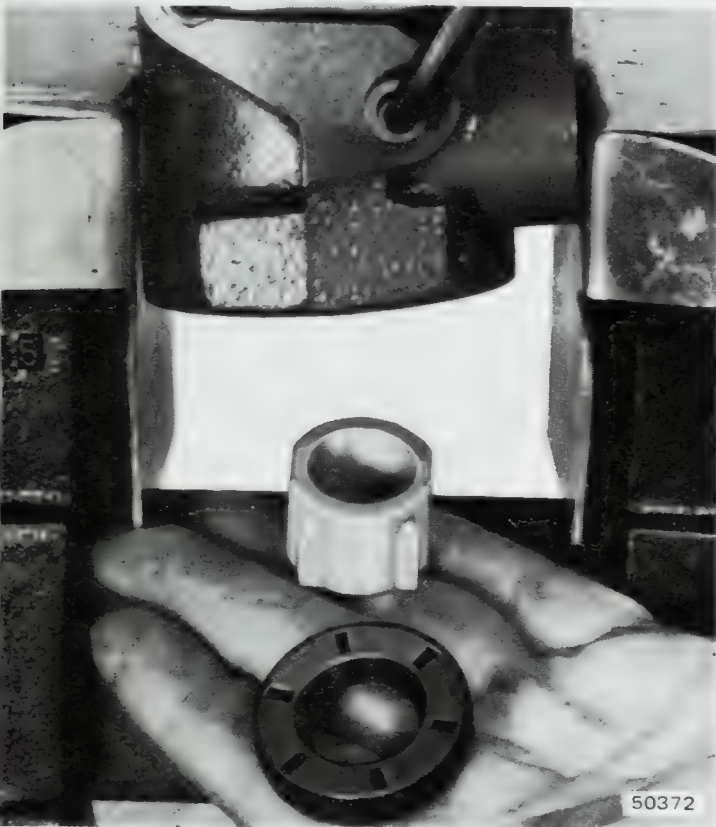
K-71 Upper Pinion Bushing and Pinion Shaft Seal Removal
